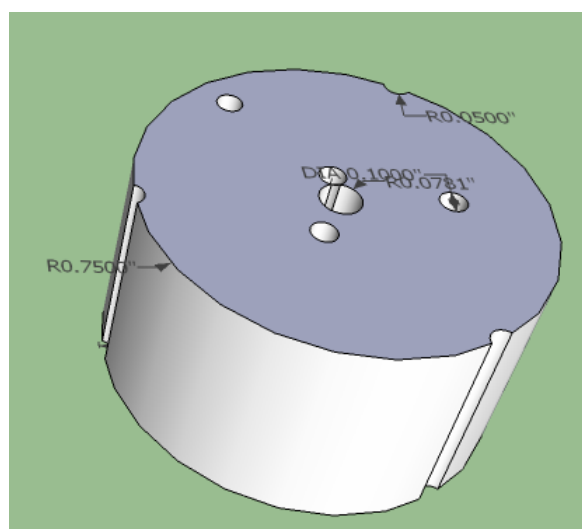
The top stainless steel insert designed for the CHTA, all dimensions are in inches; the holes are drilled for thermocouple insertion.
